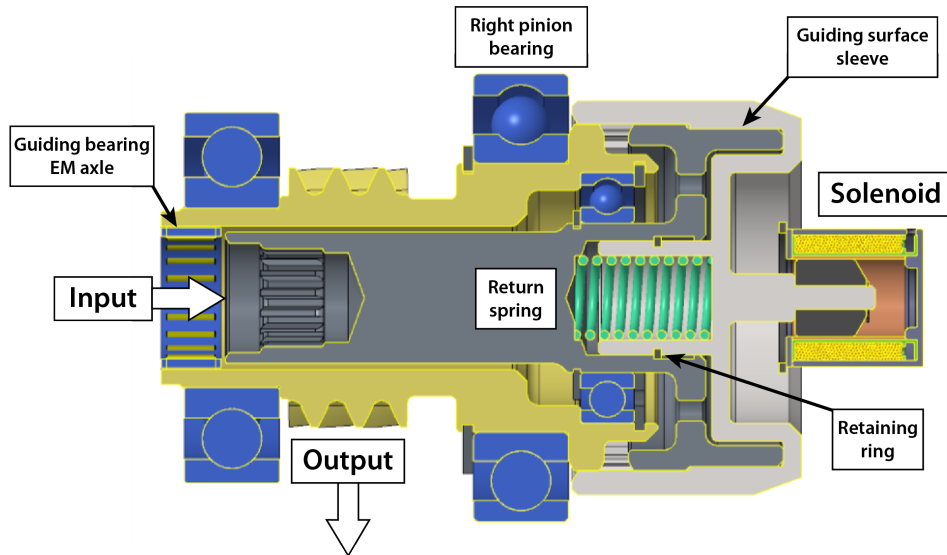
Detailed view and points of interest for concept WY. Shown in connected position.
